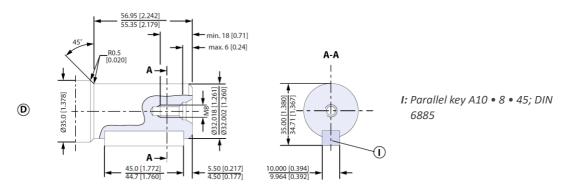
OMP shaft version: Cylindrical shaft 32 mm; DIN 6885
